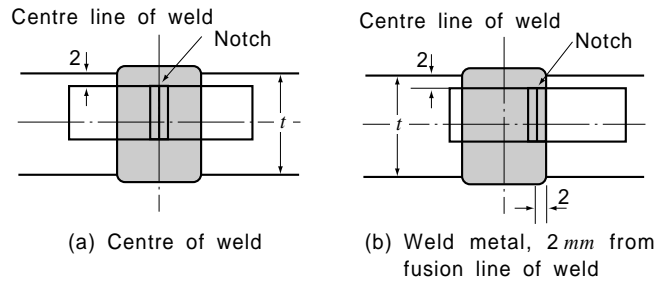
Position of Impact Specimen (Unit: mm, t = Plate thickness)
